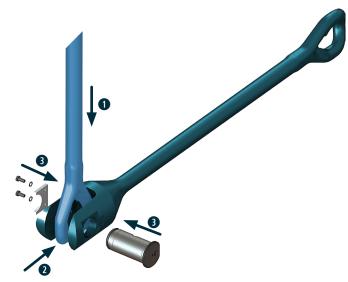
Mounting the Elevator Link Extension to the Elevator Link
